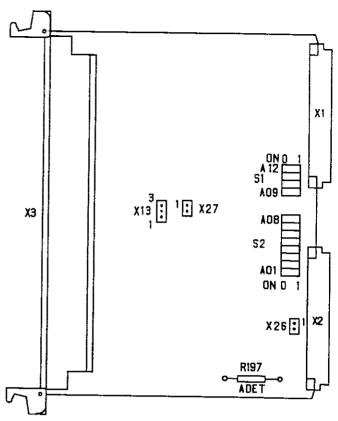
Component side (top view) with the printed board GJR5145711P2 (solder side)
